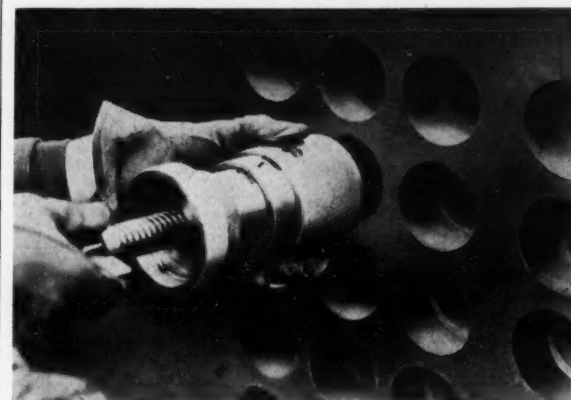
A workman inserts seal in tube sheet by turning hand-wheel on tool
